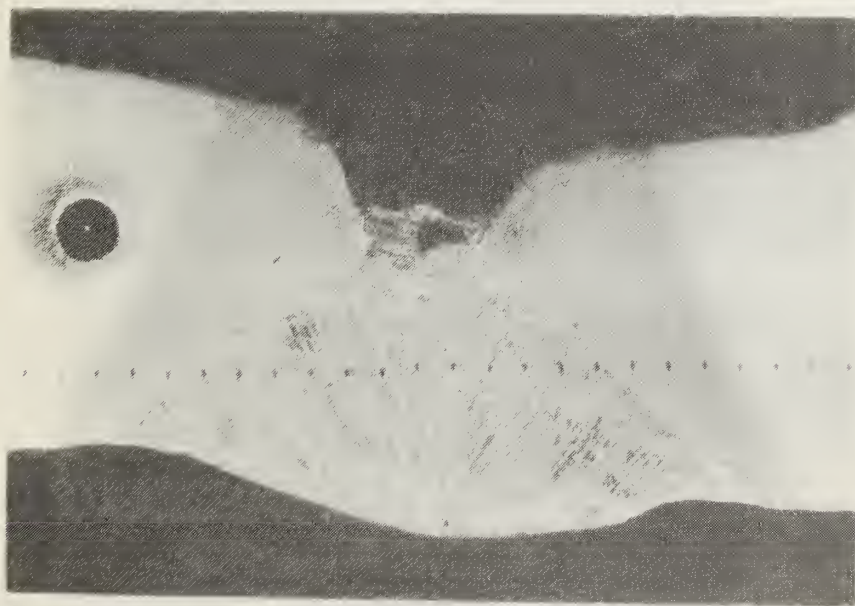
Part of the transverse section shown in figure A7.4.1-10, but at higher magnification. The region at the bottom center is weld metal. The dark gray regions on either side of the weld metal are the heat affected zones associated with the weld. The lighter regions on either side of the photomicrograph are base channel material. Etchant: two percent nital. X8.5
